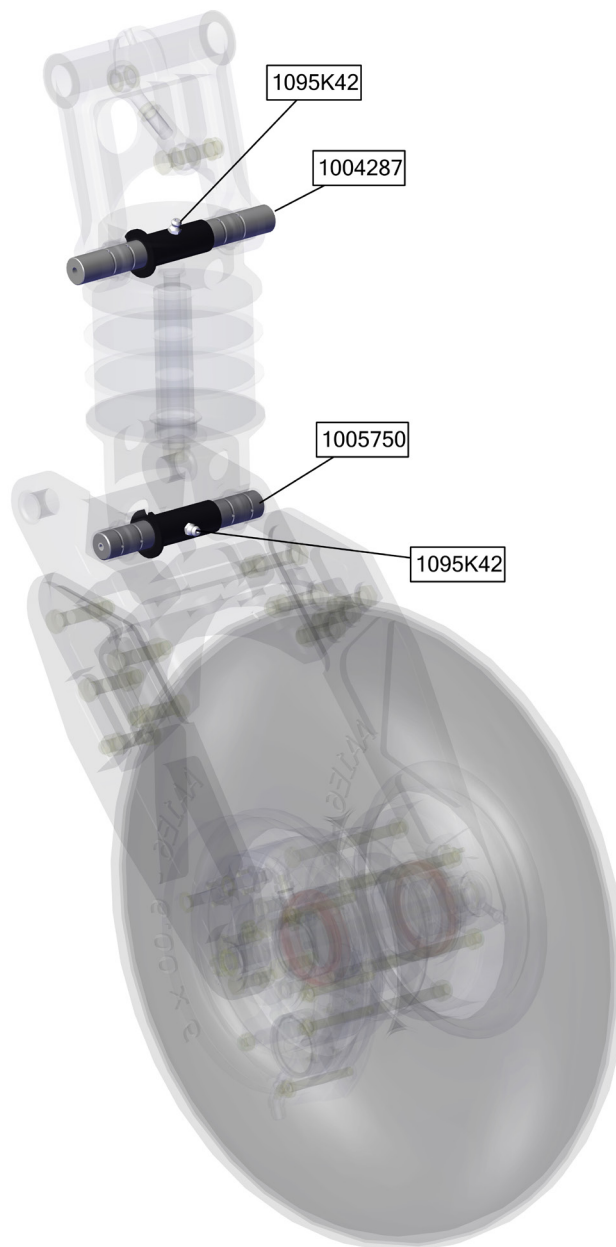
DRAG LINK, SHOCK STRUT, AND UPPER SHOCK ARM ASSEMBLY REMOVAL
